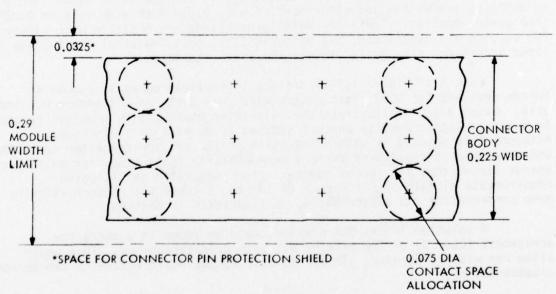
Connector and Multi-Layer Back Panel, Design Analysis (Sheet 2 of 2)
